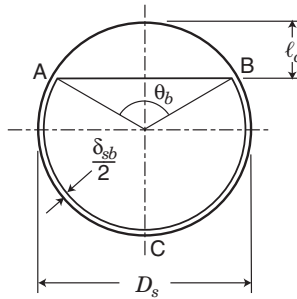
Single segmental baffle geometry showing shell-to-baffle diametral clearance δ_{sb} .
